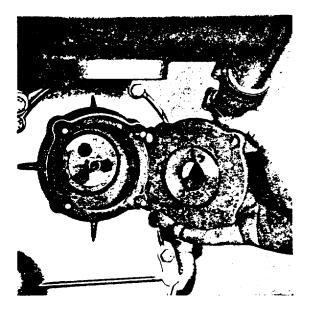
Inspection Cover removed to gain access to Fuel Pump Gear Securing Setscrews.
